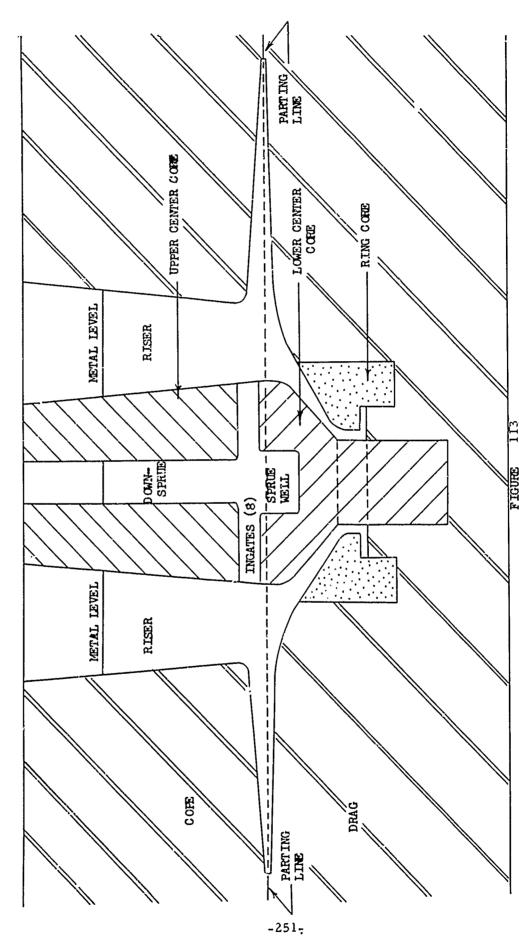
BURST TEST DISC RIGGING SKETCH
